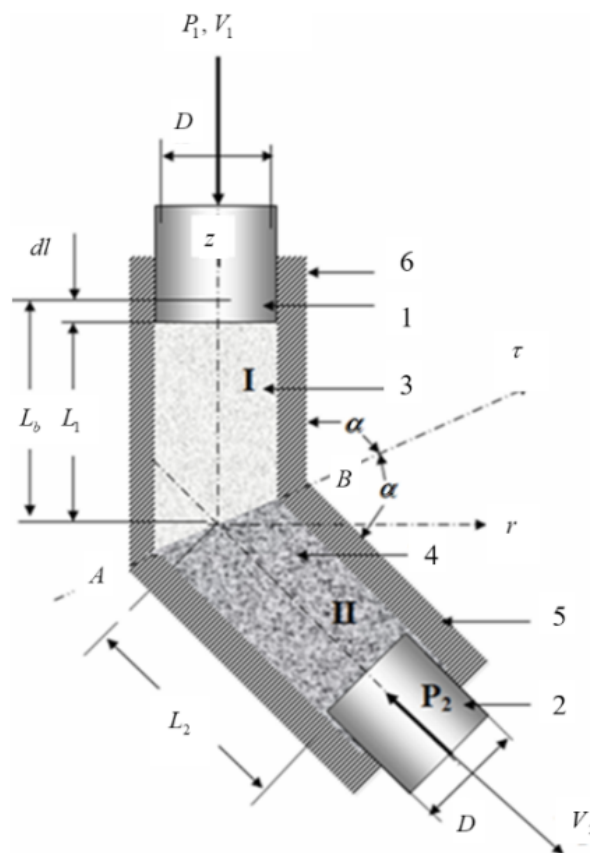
Scheme of equal-channel angular pressing: 1 – punch creating working pressure; 2 – punch for back pressure; 3 – part of the extruded blank; 4 – pressed part of the blank; 5, 6 – parts of the a pressing tool with output II and input I channels
